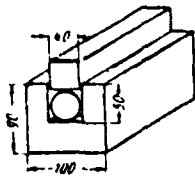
Die/stamp for obtaining the blank of the ingot. Length of the dies/stamps: 1st 500; 2nd 600; 3rd 1000 mm.
